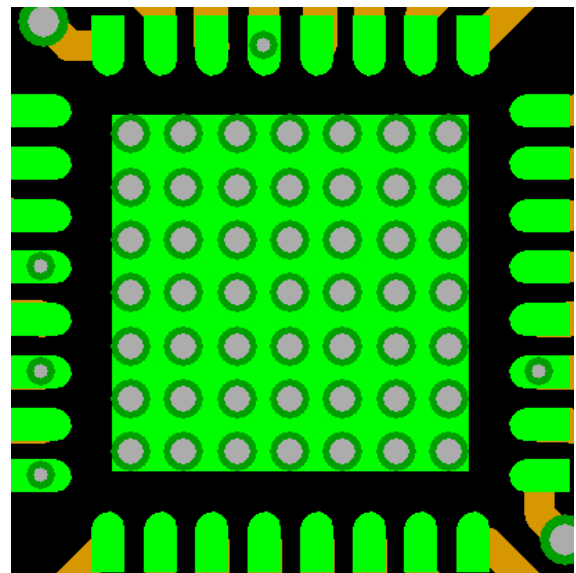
Evaluation Board Layout for the ADRF6780 Package
